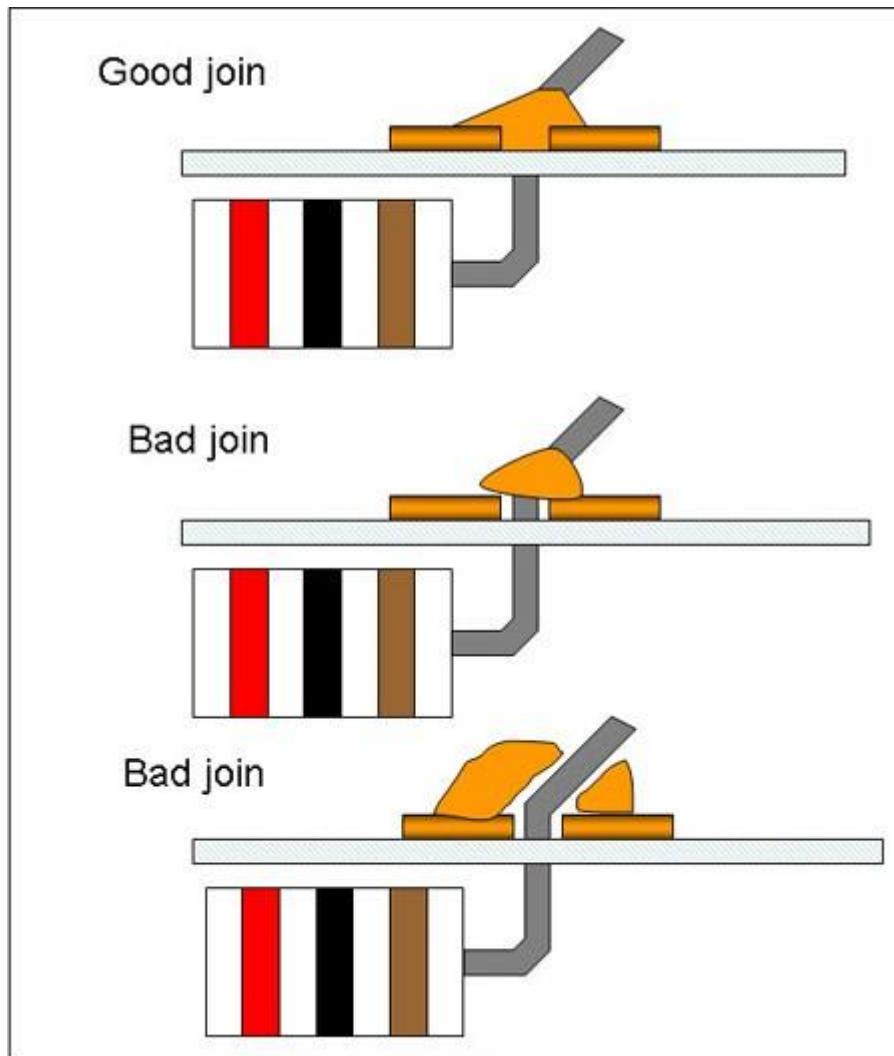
The solder in a good join will be shaped like a cone, with solid contact between the solder and all surfaces to be joined. Bad joins (also called *dry joins*) should be melted and remade.
